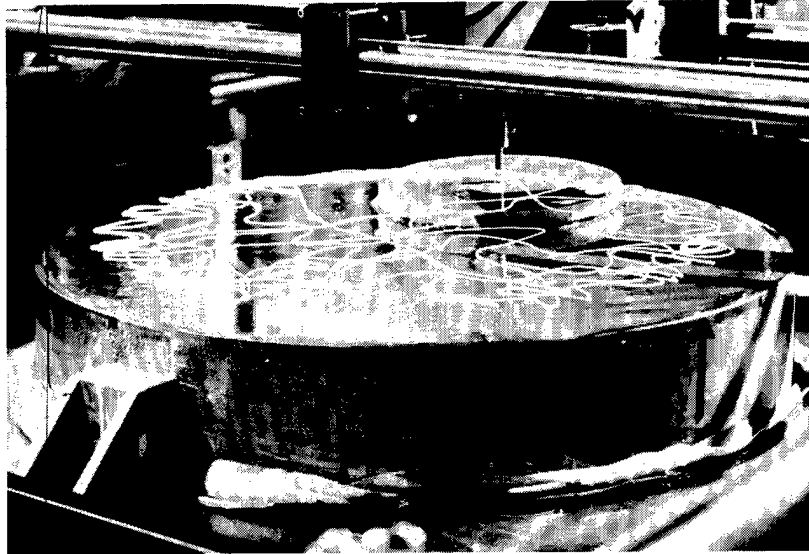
Tool movement on the 50-in. XY machine in its original configuration
